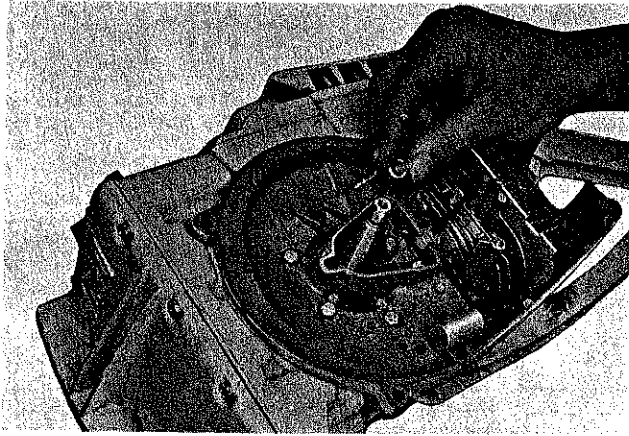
The crankcase cover is attached to the crankcase with six screws. Two of these, which are inside the breaker point box, are sealing screws.
